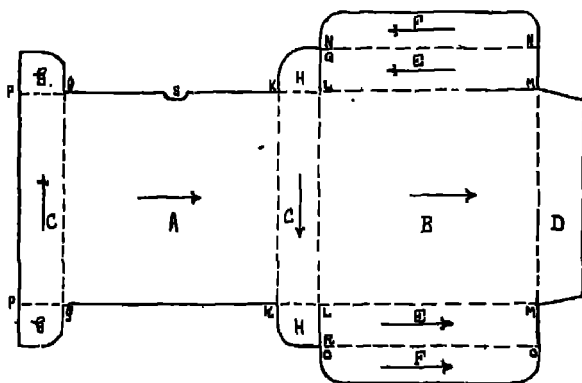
SINGLE-PIECE CUBE BLOCK CHOCOLATE CARTON.
